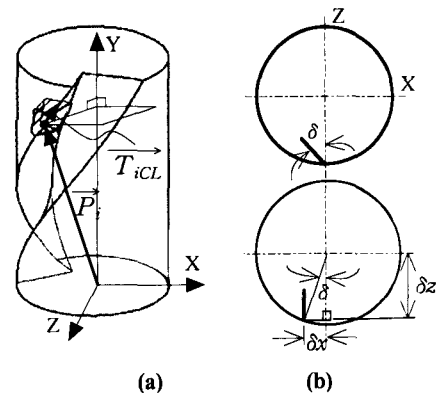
The machining of insert tip place; (a) Cutter axis direction vector, (b) Radial rake angle
